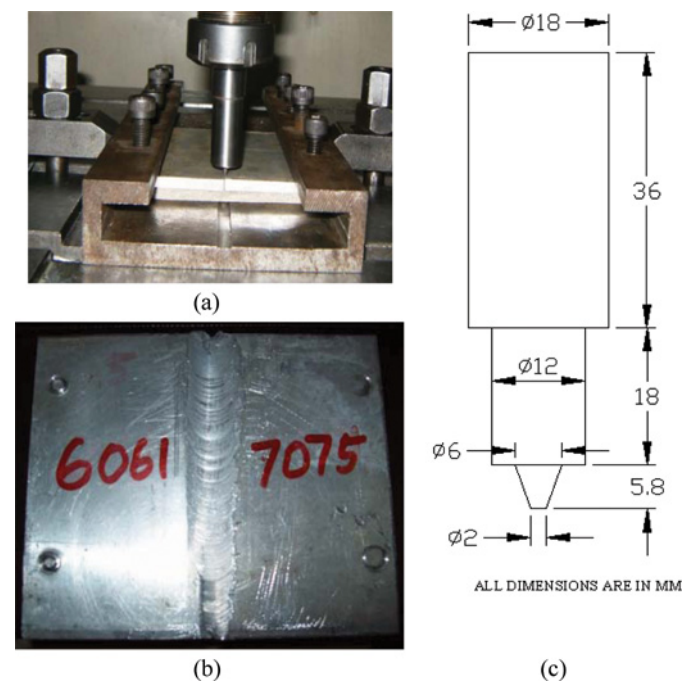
(a) Fixture, tool, and plates assembly before welding. (b) Conventional weldment. (c) Tool dimensions (color figure available online).
